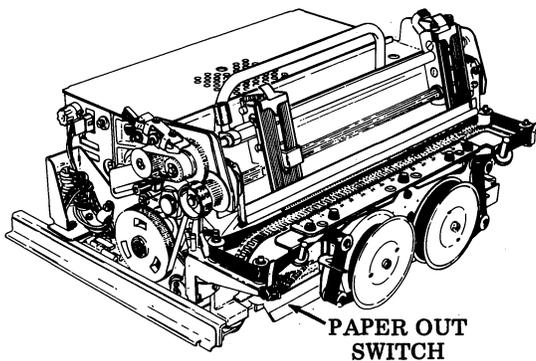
Paper Out Switch (Tractor Feed Printer)
